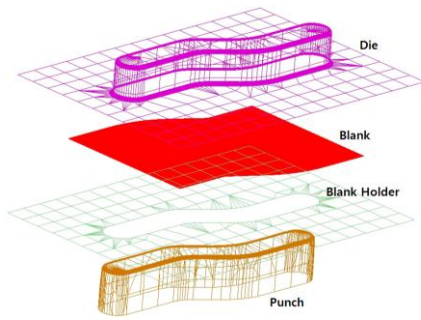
Schematic view of the blank and tools for the S-rail forming process
